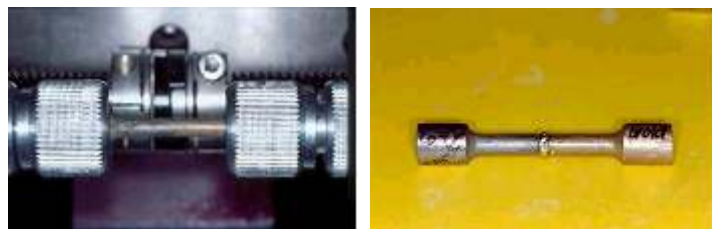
Specially designed holding device & laser welded specimen.
